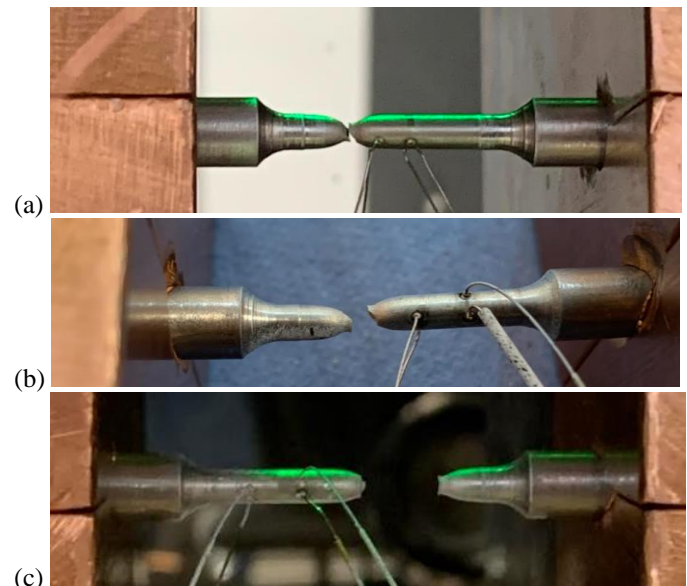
(a) 6032 fractured specimen with TC2 positioned on the left. (b) 6034 fractured specimen with TC2 positioned on the right. (c) 6035 fractured specimen with TC2 positioned on the left.
